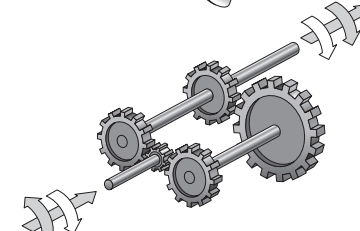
(1). Drawn cup clutches and clutch and bearing assembly applications
